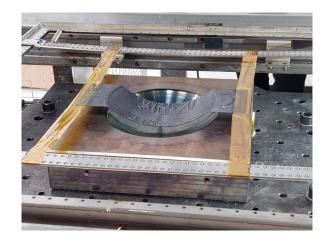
Lower tool, press formed specimen and laminate handling setup
